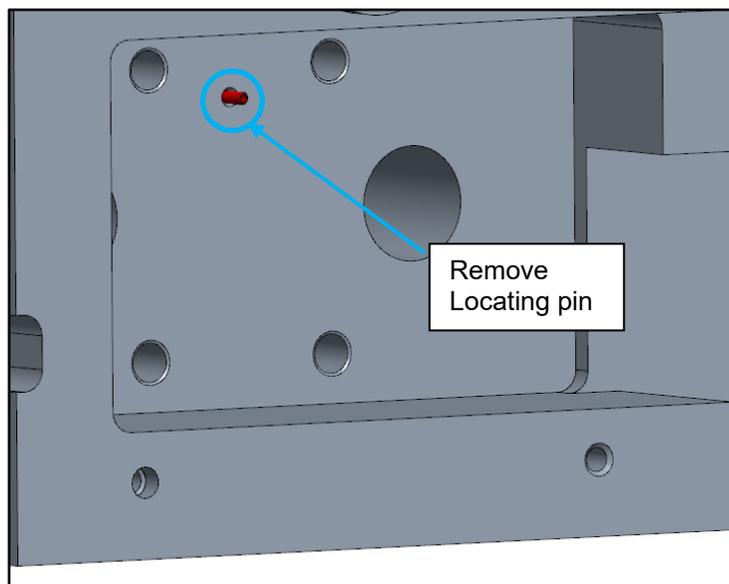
Shuttle Valve Locating Pin in VS-DX Manifold
